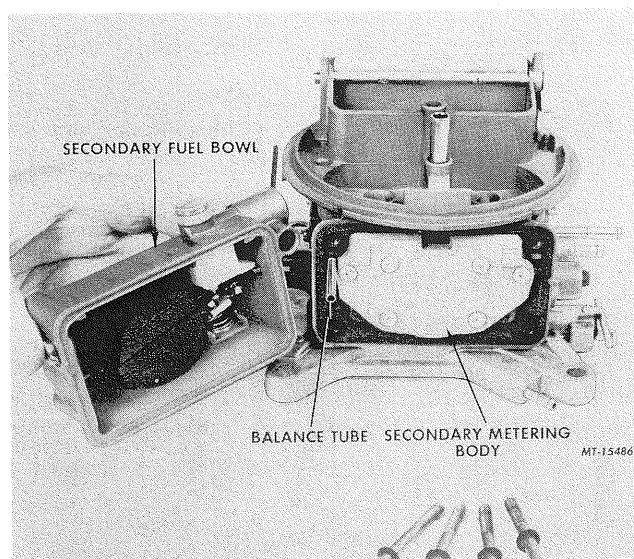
Removal or Installation of Secondary Fuel Bowl (Model 4160)
